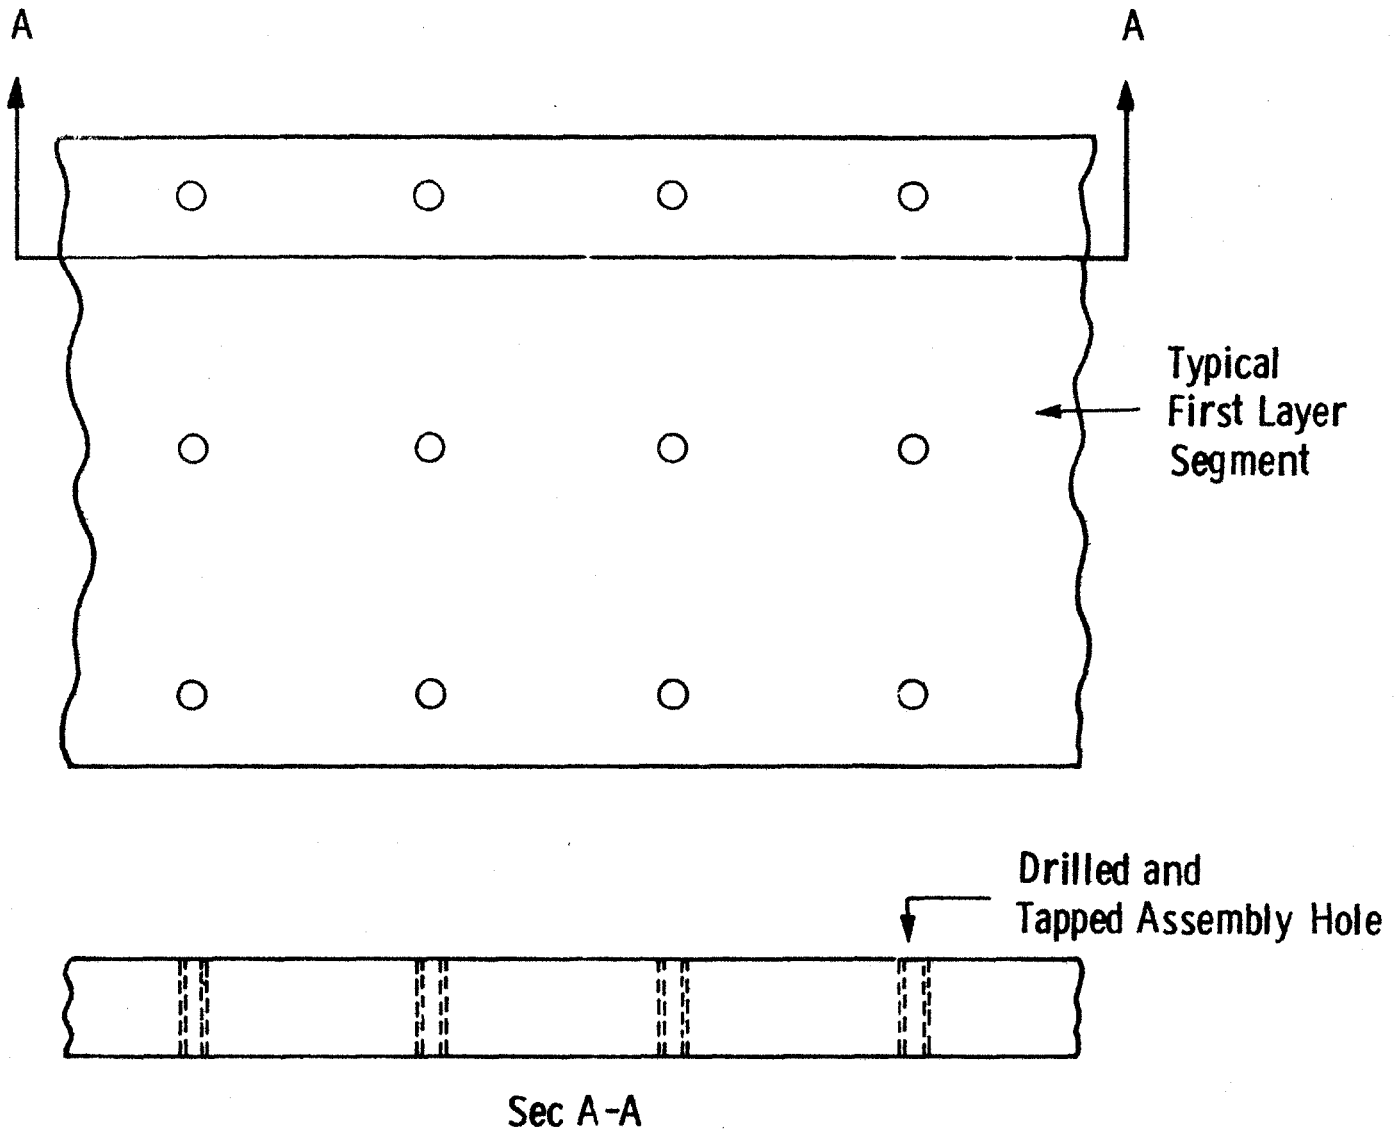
Assembly Holes in Typical First Pancake Layer Segment
